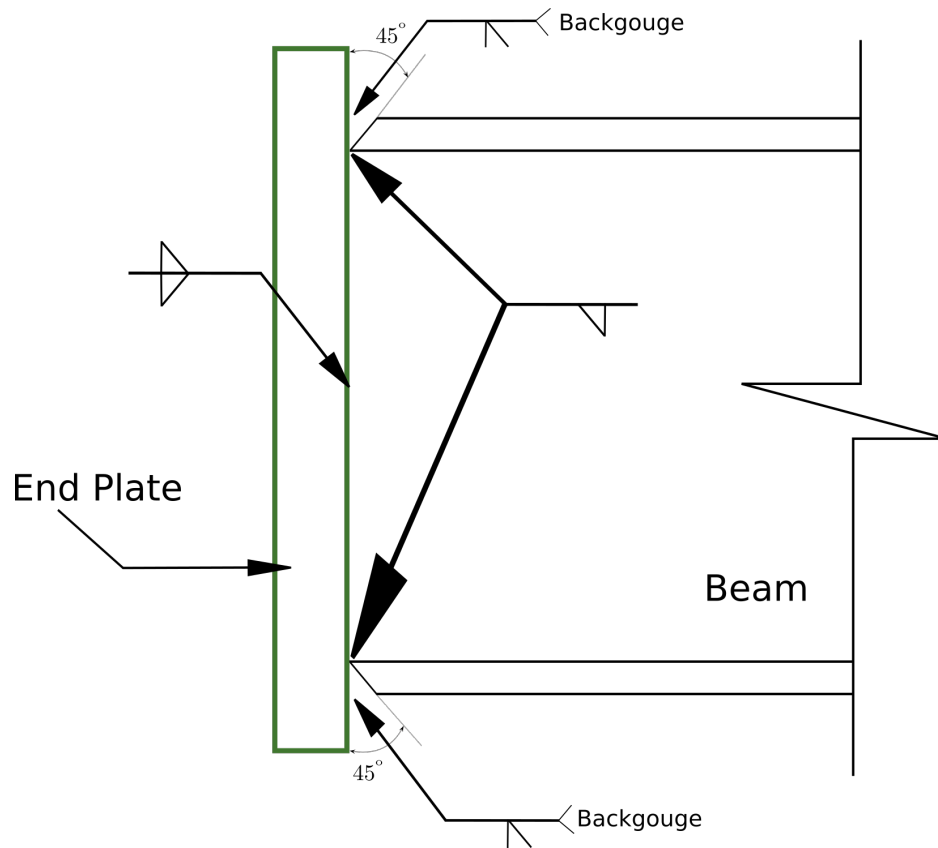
Typical Weld Details - Beam to End Plate Connection
